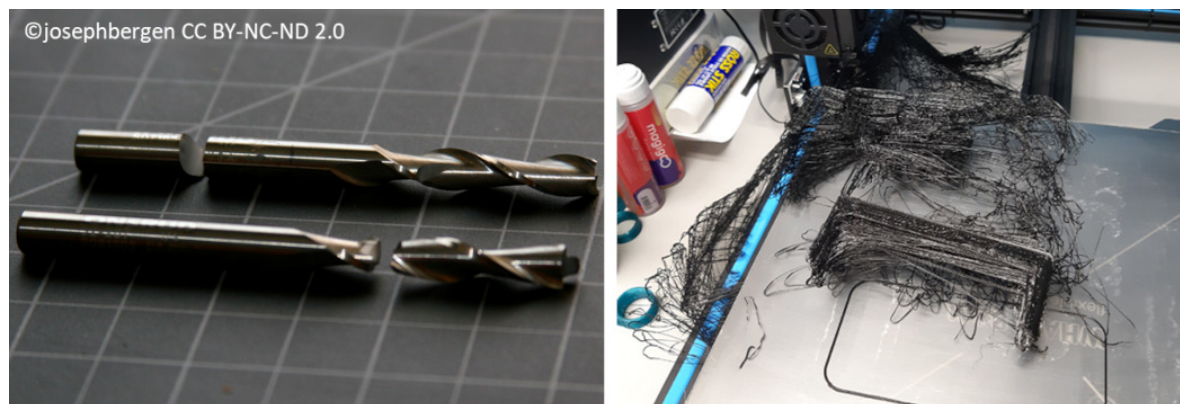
Examples of manufacturing failures: broken tools and work holding failures.
